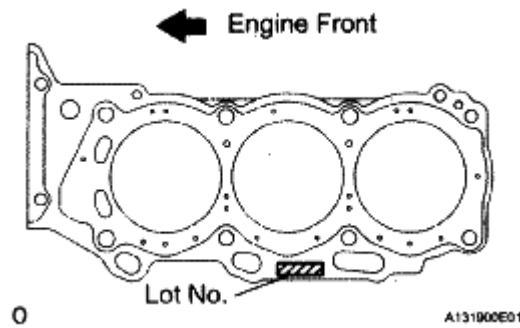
Placing Cylinder Head Gasket On Cylinder Block Surface With Front Face
